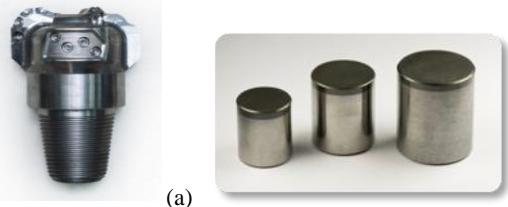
The working part of the milling drill bit (a) and PDC cutters (b).
